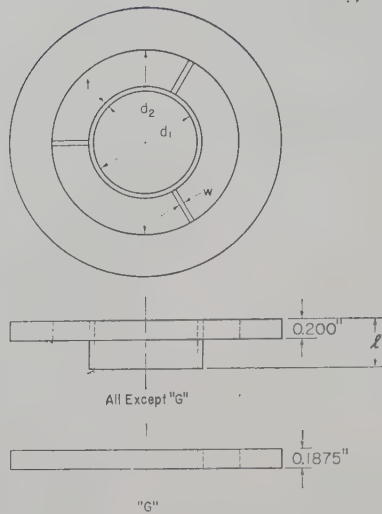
General drawing of open end plates; end view at top, side views at bottom.
